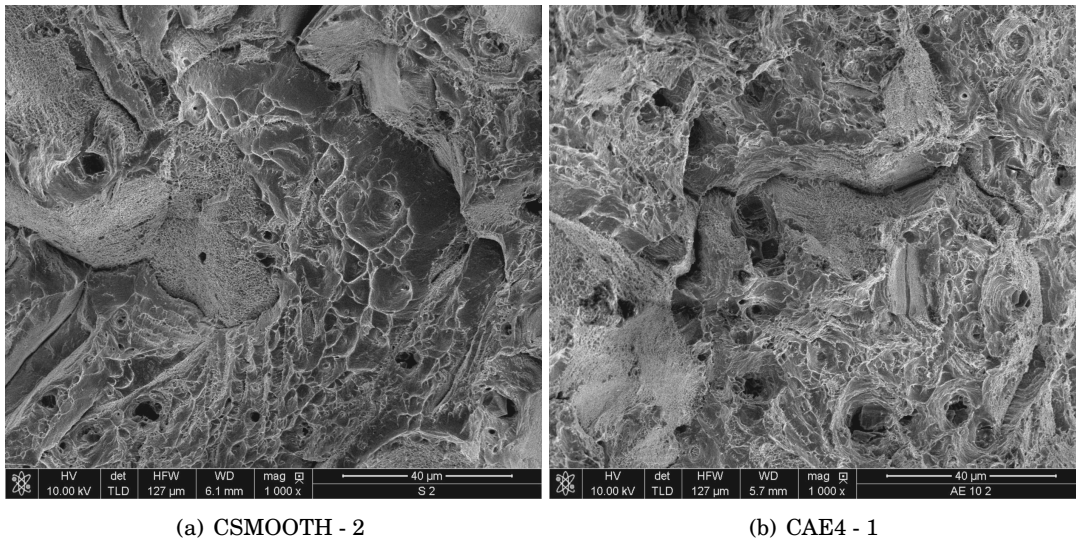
Fracture surfaces observations of the notched specimens CAE4-1 and CSMOOTH-2. The fracture surfaces are characterized both by intergranular fracture and transgranular fracture. Images were taken near the centre of the fracture surface.
